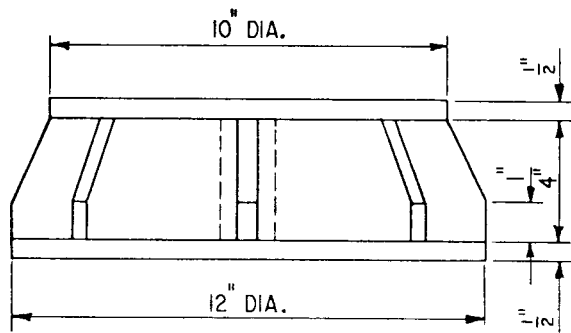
Rigid Bearing Plate for 12 in. Diameter Test
